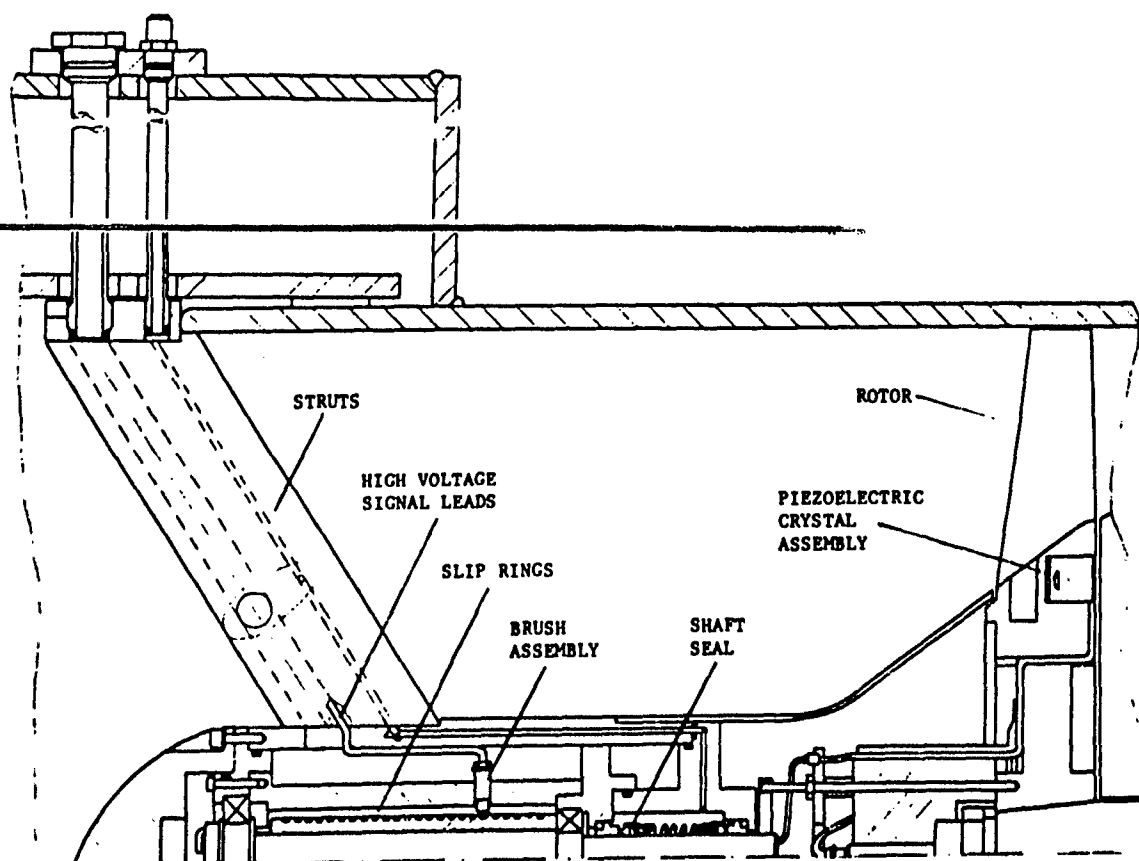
Cut-away view of the test section, showing the rotor and piezo-electric crystal assemblies, the center-body, and support struts (from Crawley 1982).
